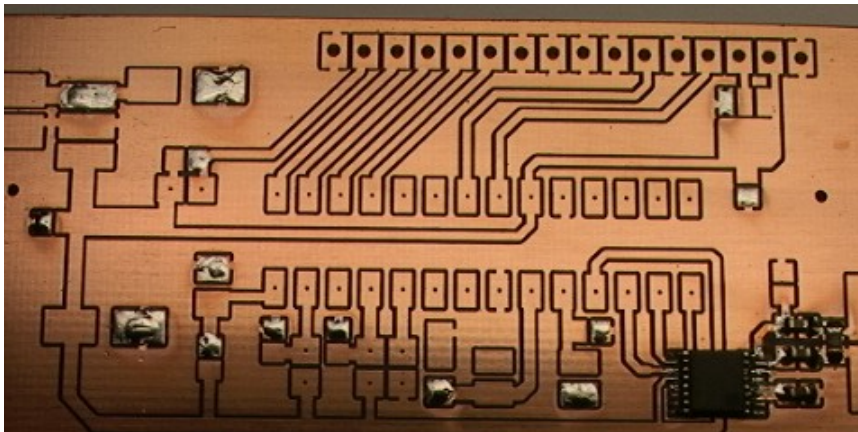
RF-FrontEnd done and tack-solder added to pads
